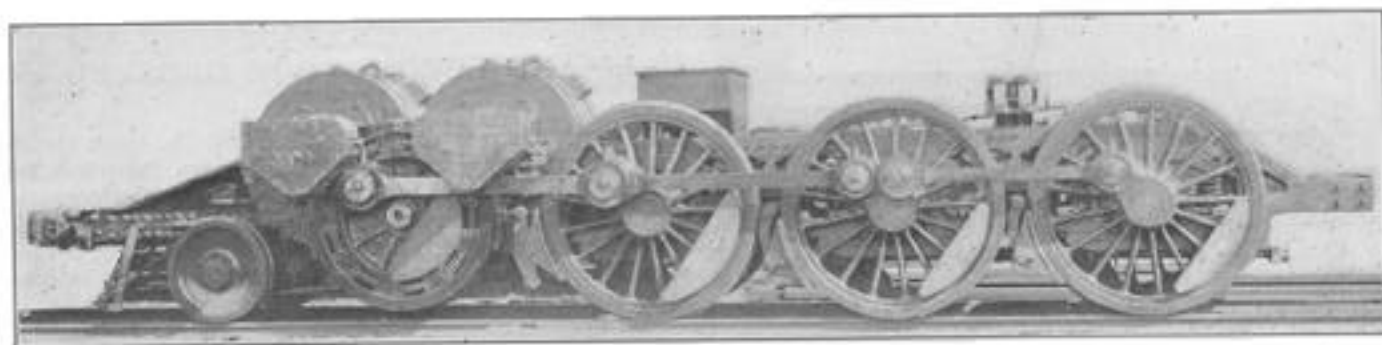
One of the Driving Trucks for the Pennsylvania Electric Locomotive Showing Motor and Spring Gear Jack Shaft
